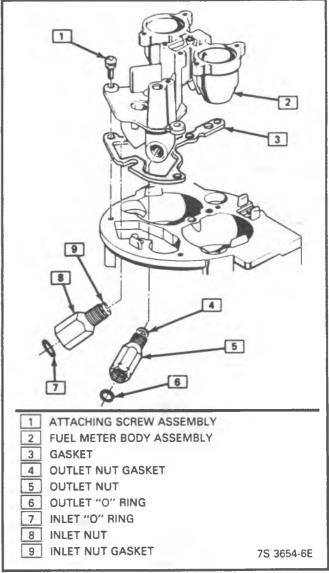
Fuel Meter Body Assembly - TBI 220
